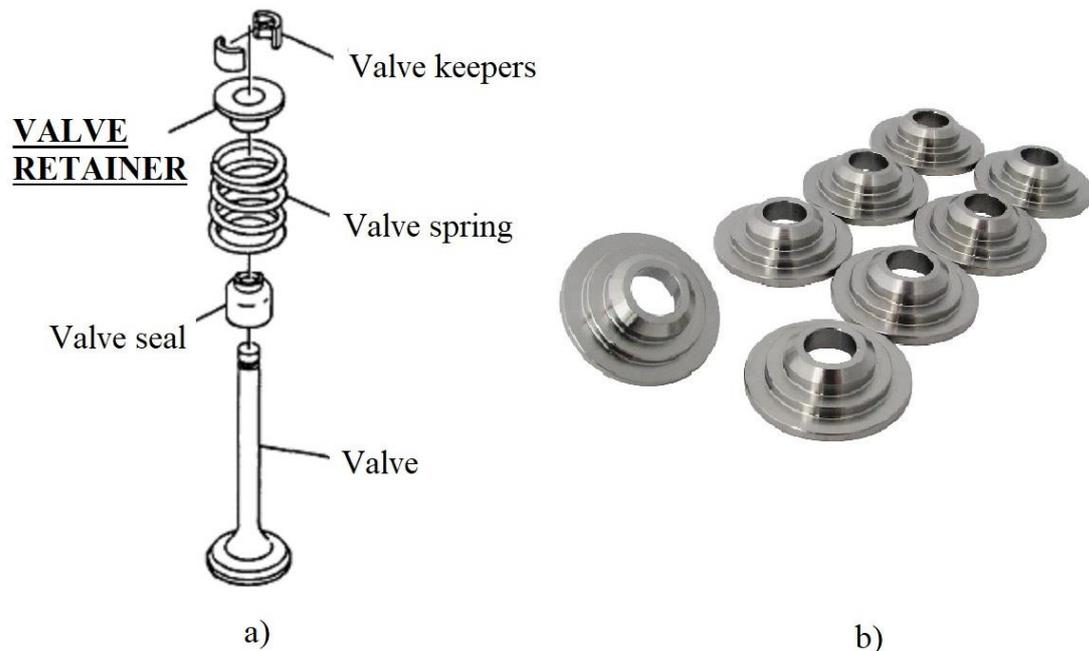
a) exploded view of an engine's valve assembly; b) upper valve retainers
